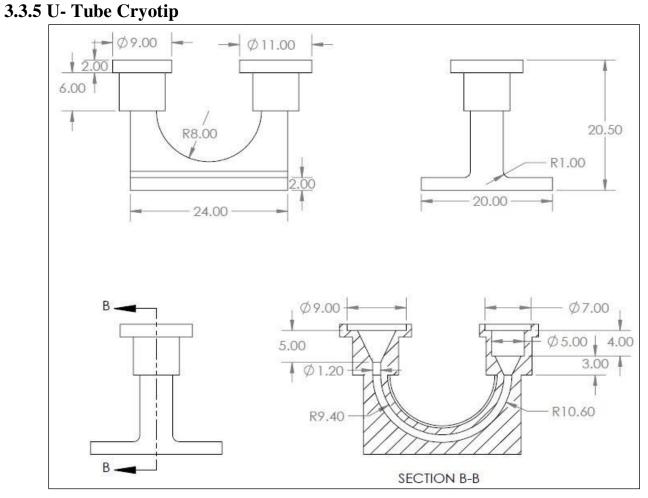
U-Tube Geometry (Source: Solidworks)
